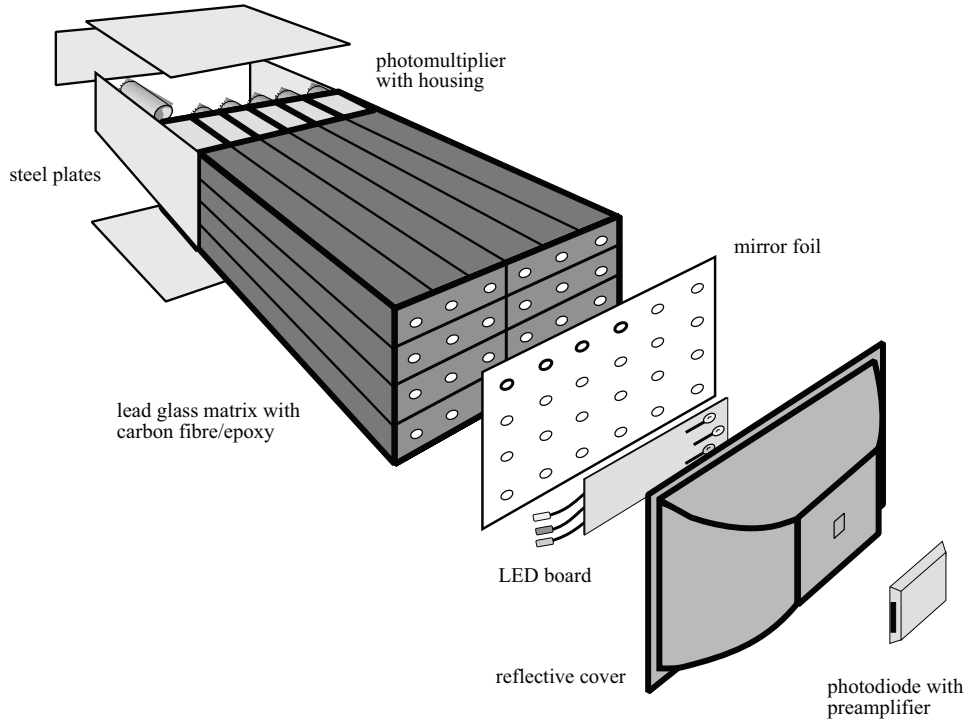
Exploded view of a lead-glass detector supermodule. [69]
